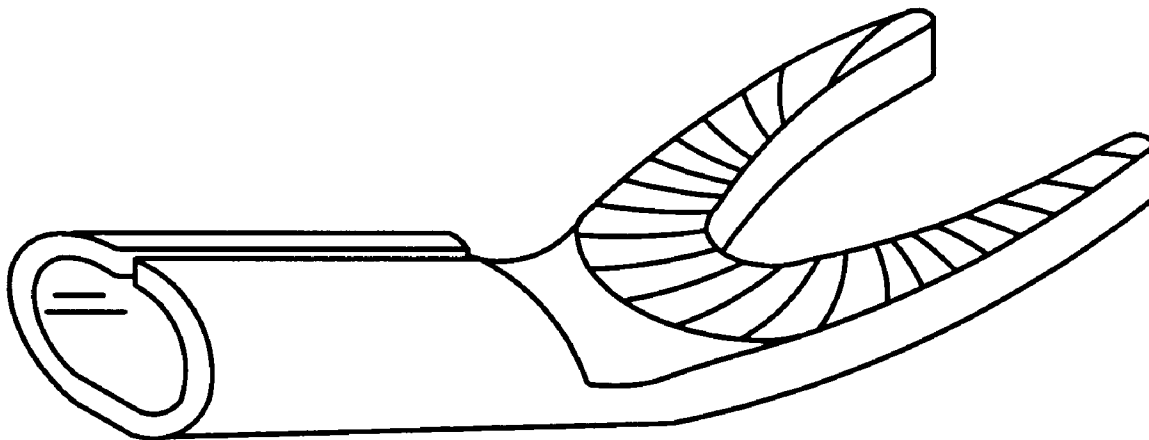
is a left side view of the electrical wire terminator shown in FIG. 1.
